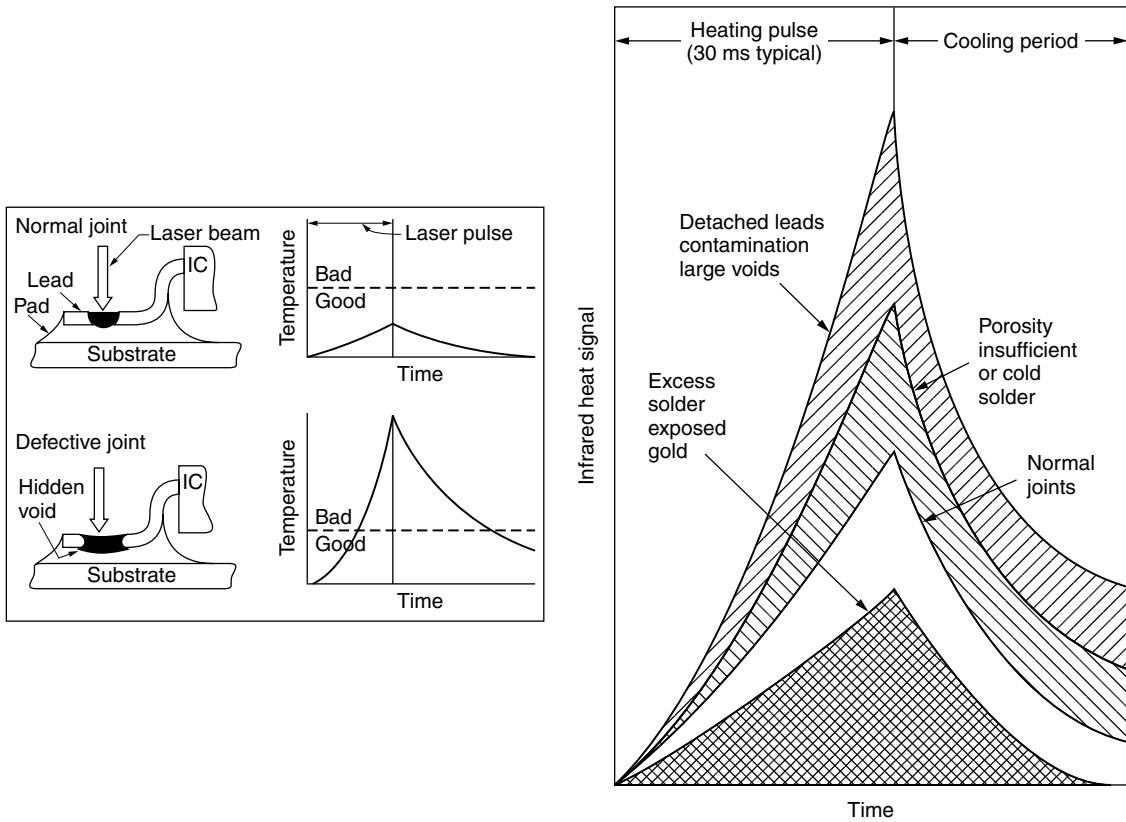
Thermal signatures vs defects of solder joints [61]
